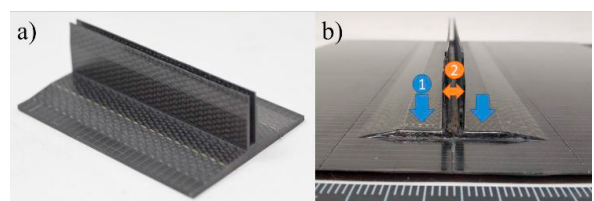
(a) Trimmed pi-NCF specimen; (b) Critical pi-NCF moulding points.
